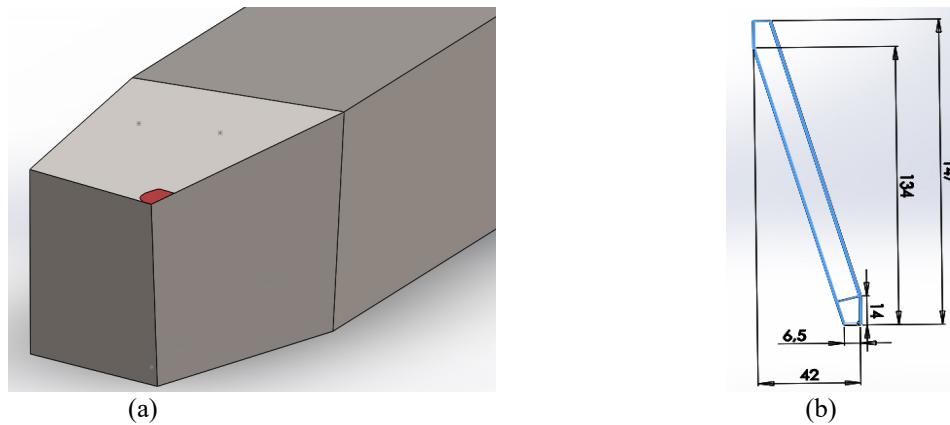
Fast steel cutting tool for 900 rpm rotation: a) three-dimensional view with critical region highlighted in red; b) main dimensions of the cutting tool [mm].
